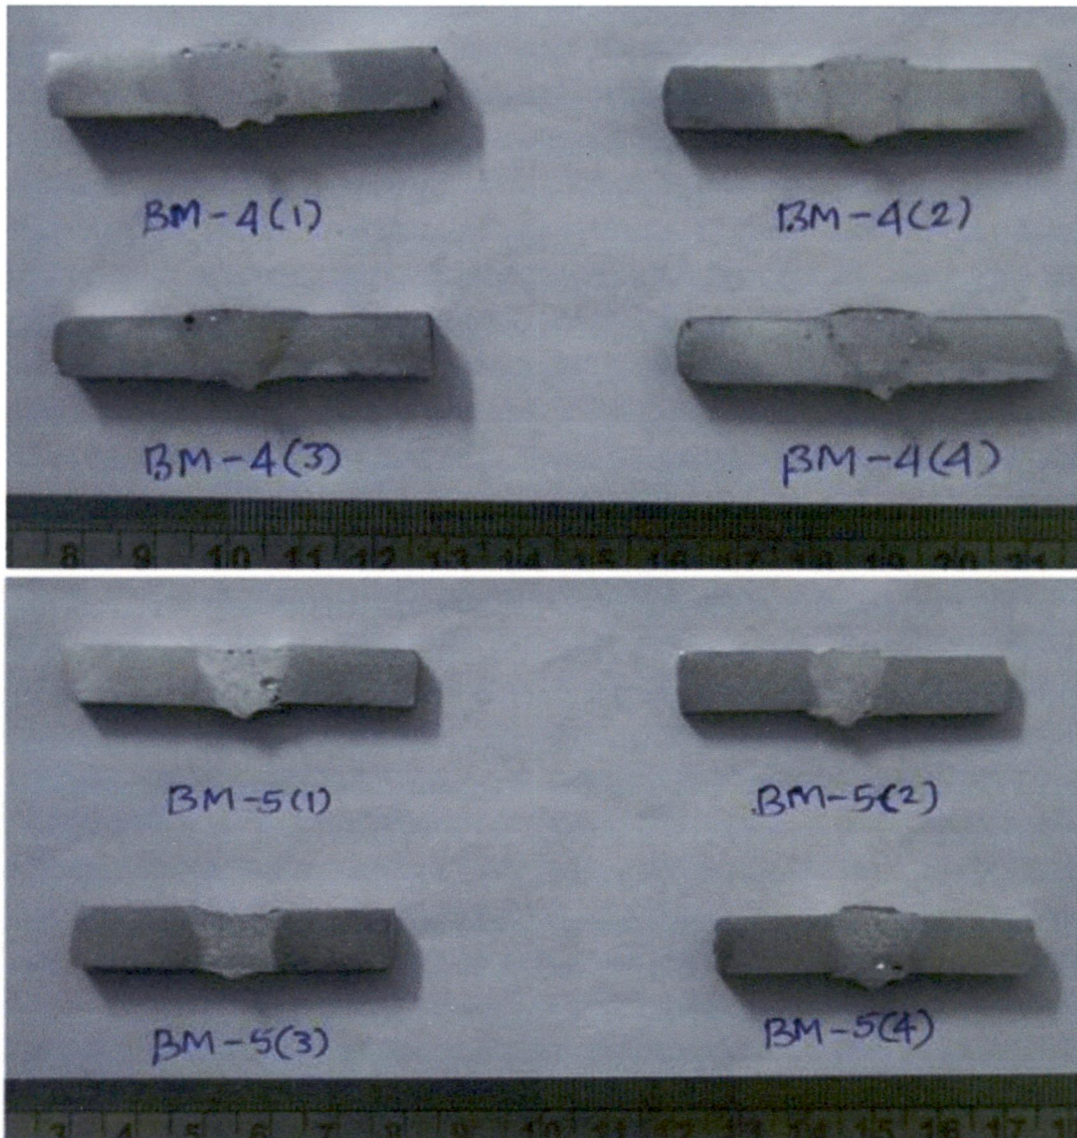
Weld Transverse sections of the GMA welded plates of BM-4 and BM-5 material at different welding parameters
